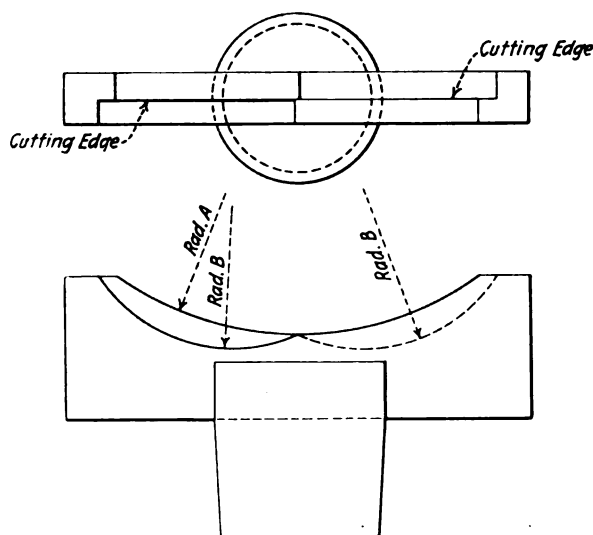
The tool is placed on the live spindle of the lathe and adjustments can be made by moving the tail stock
